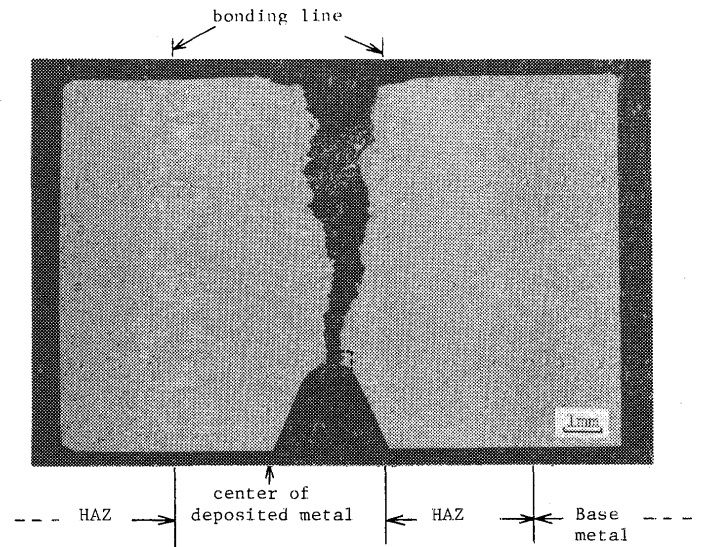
Example of unit crack path at the cleavage fracture surface in the negative specimen (B2)
